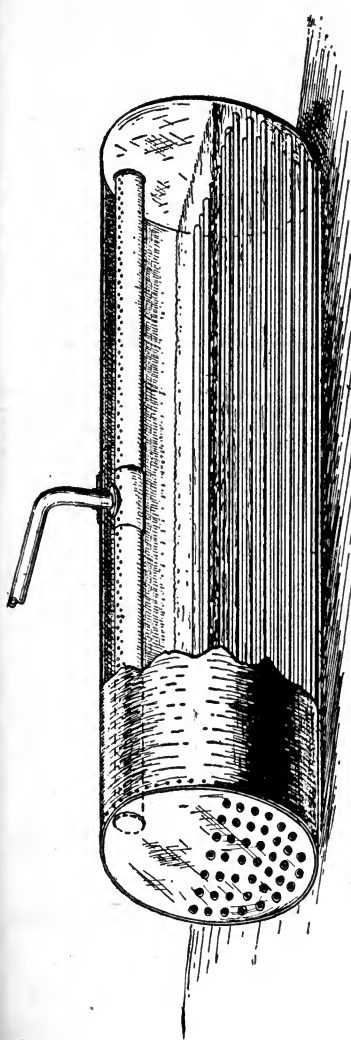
So called "dry pipe" for horizontal boiler; it is connected to the main outlet and its upper surface is perforated with small holes, the far end being closed. With this arrangement steam is taken from the boiler over a large area, so that it will contain very little moisture. All horizontal boilers without a dome should be fitted with a dry pipe; most engineers do not realize the importance of obtaining dry steam for engine operation.
